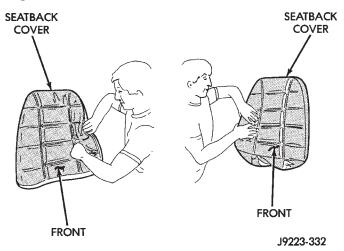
Straightening Seam Welts and Lining—Standard Seat
